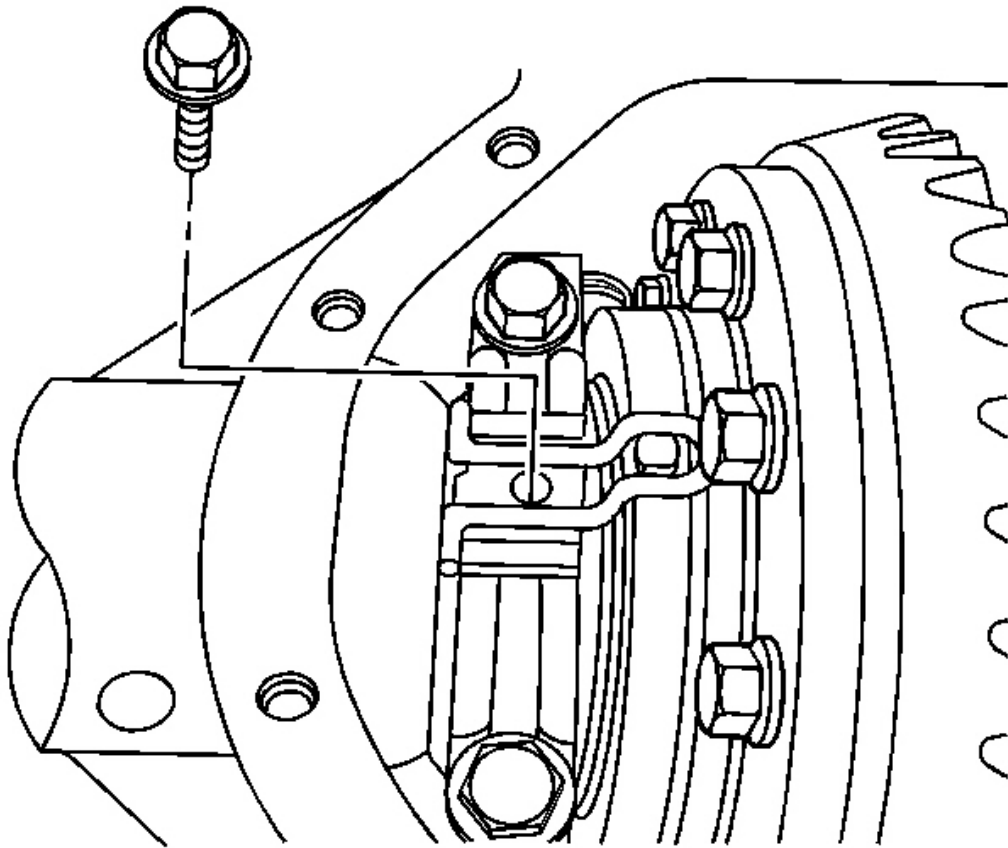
Locking Differential Coil Assembly Lock Bolt
